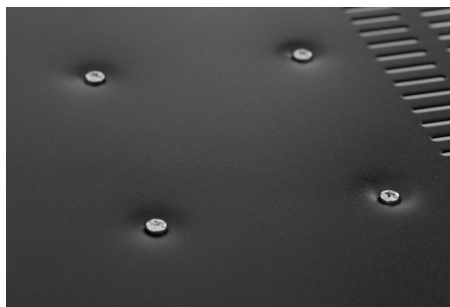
3 mm screws embedded in the indented holes. This prevents scratching the surface on which the vocoder is placed. When creating these indentations, avoid warping the steel enclosure cover.
